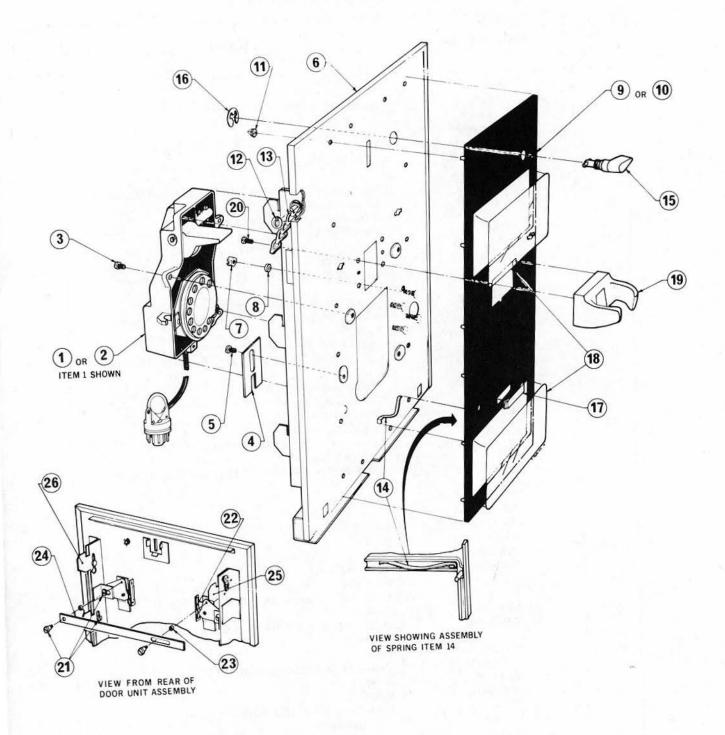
Door Unit P0521211 or P0521212 — See Table C For Assembly of Parts Detail
